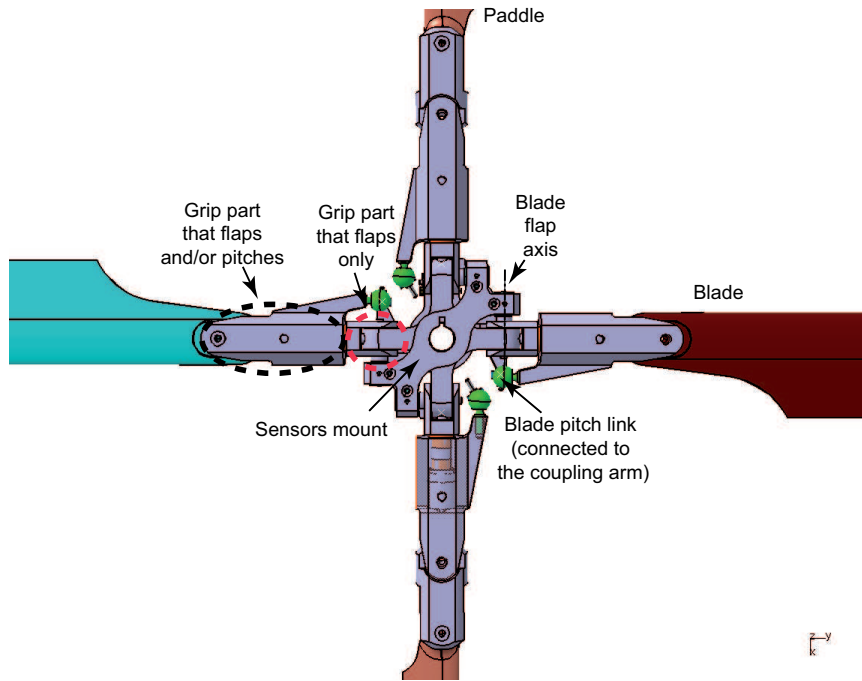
Top view of the rotor to be tested in the hover stand.
